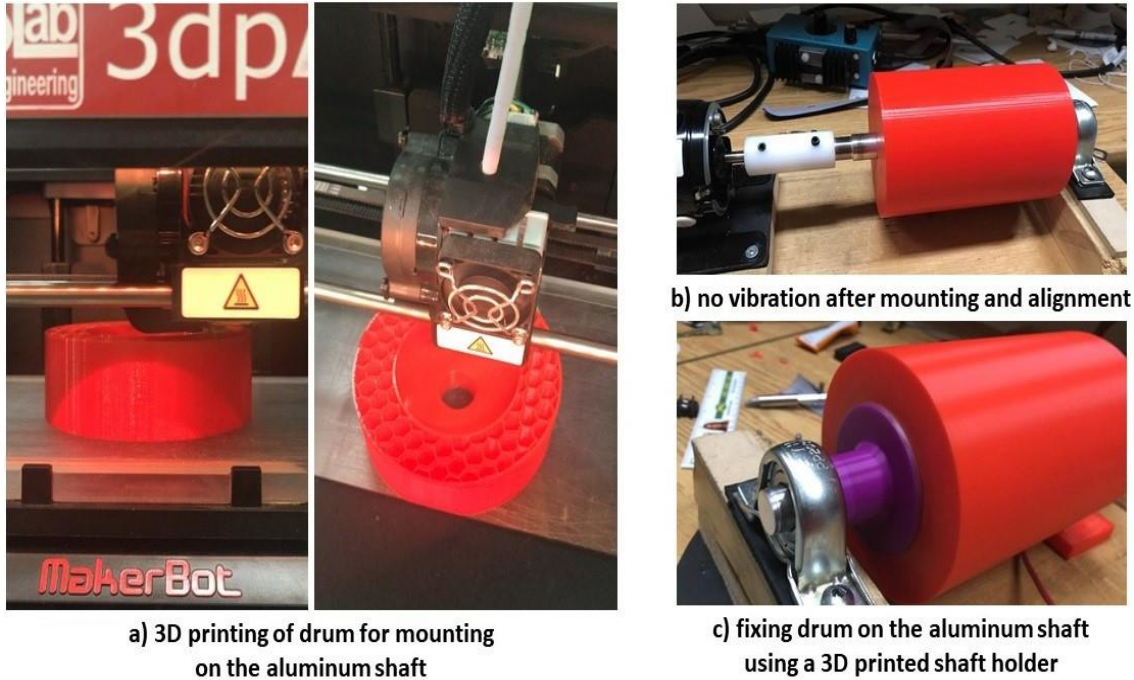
Rotating drum setup: a) 3D printing of drum for mounting on the aluminum shaft, b) no vibration after mounting and alignment, and c) fixing drum on the aluminum shaft using a 3D printed shaft holder.
